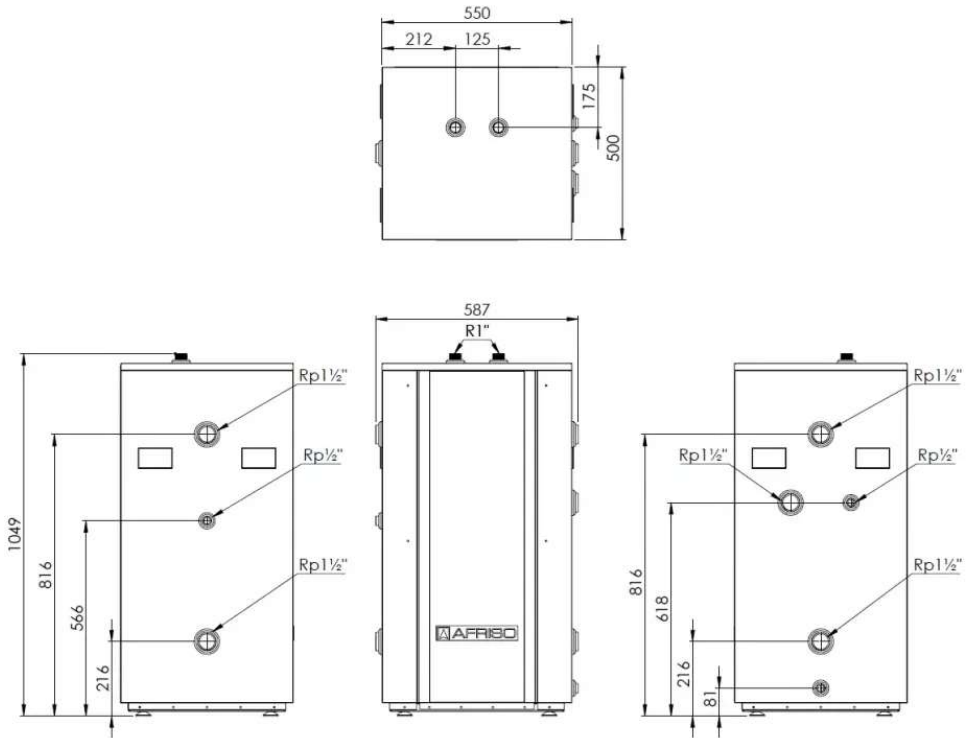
Dimensions of the ABT 160 buffer tank and its connections
